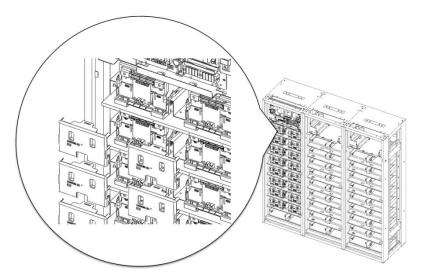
Assemble Module #8 and Module #9 Front Cover
